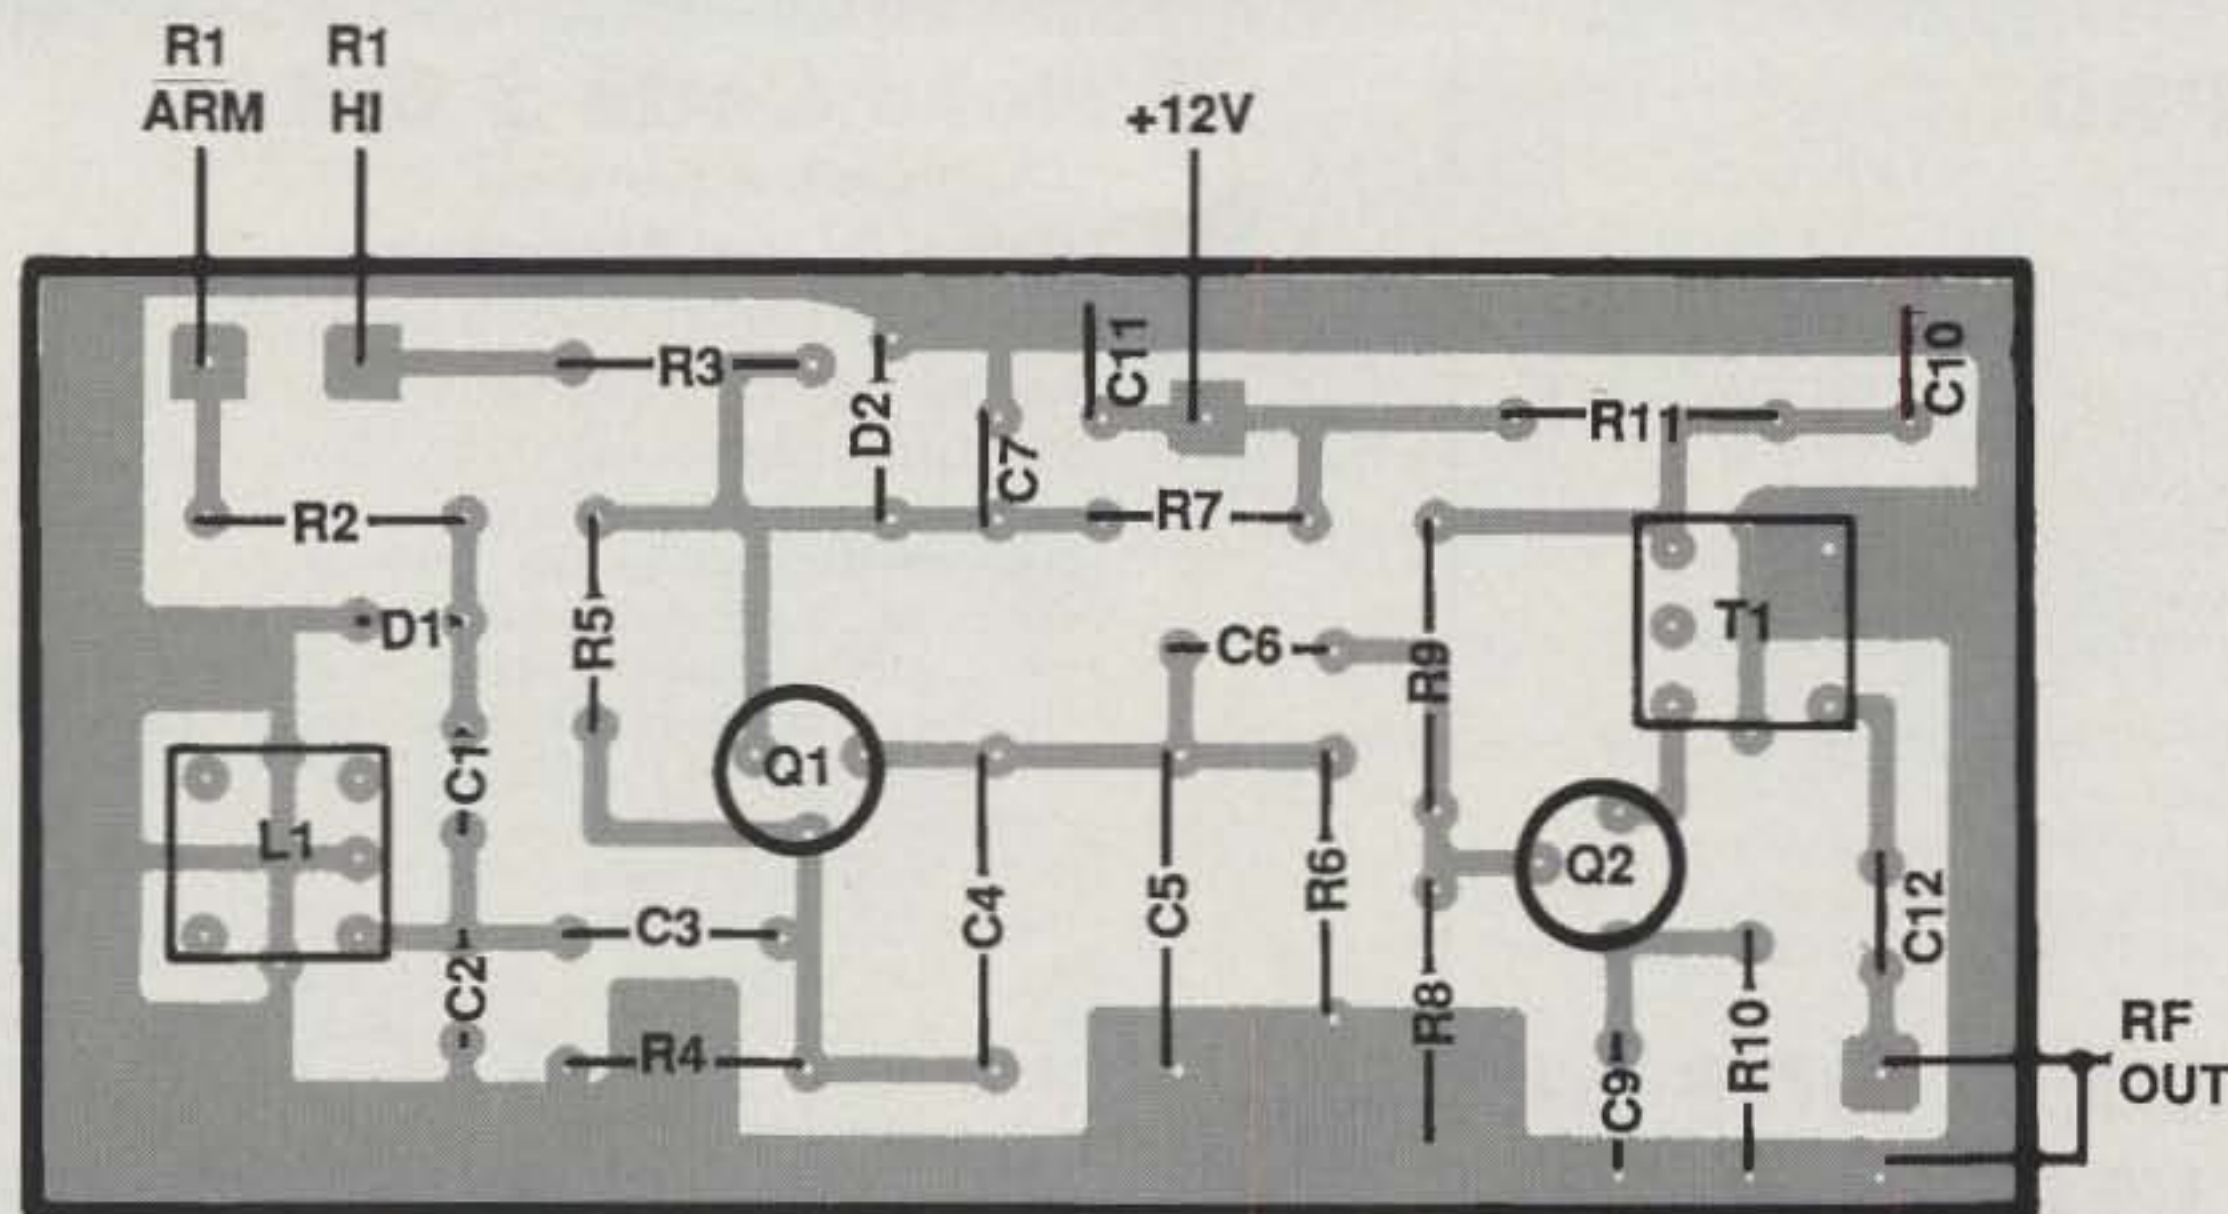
Parts-placement guide for the BFO as viewed from the component side of the board. Drawing is not to scale.
